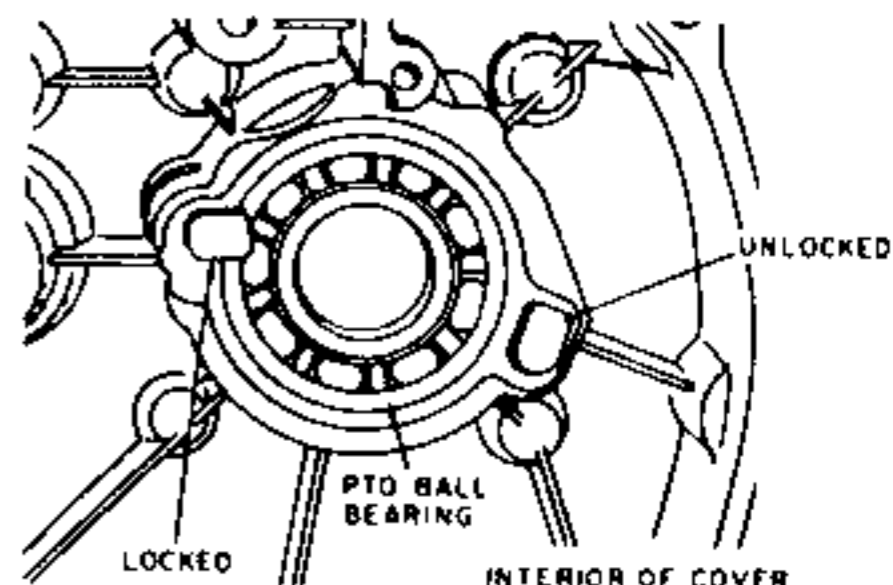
Interior view of crankcase cover and ball bearing locks used on Models HM70, HH70, HM80 and HM100.
